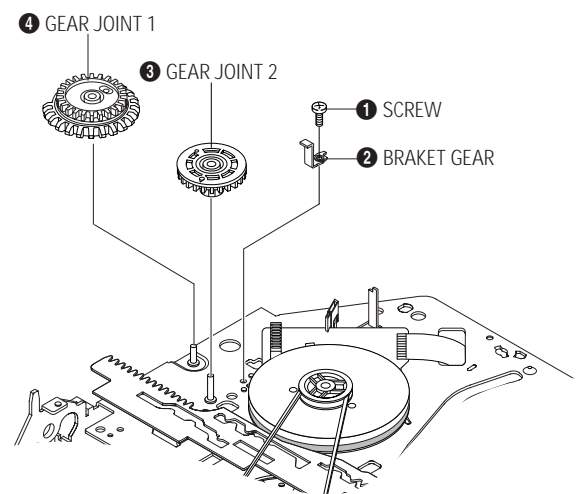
Bracket Gear, Gear Joint 1,2 Removal
